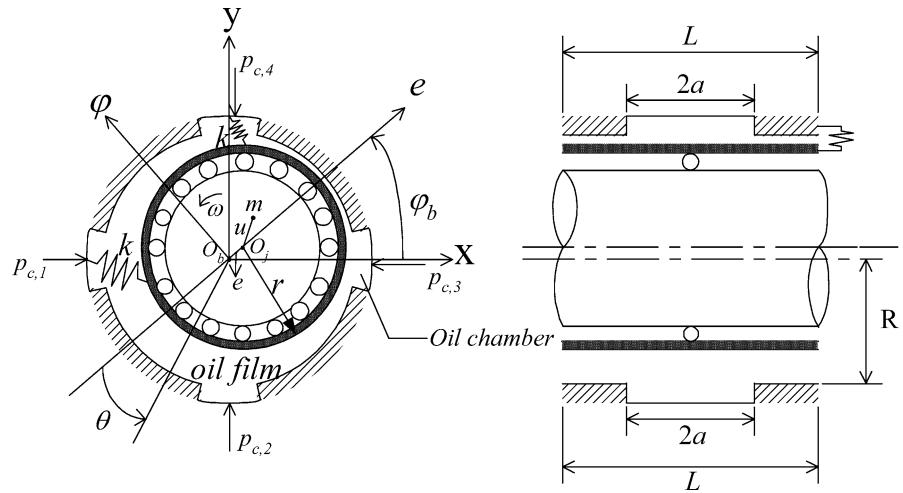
Schematic illustration of hybrid squeeze-film damper mounted gear-bearing system
